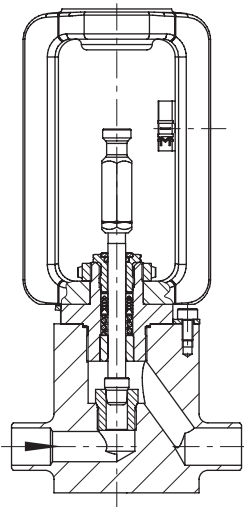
· Type 3252 High Pressure Valve as globe-style valve with welding ends
